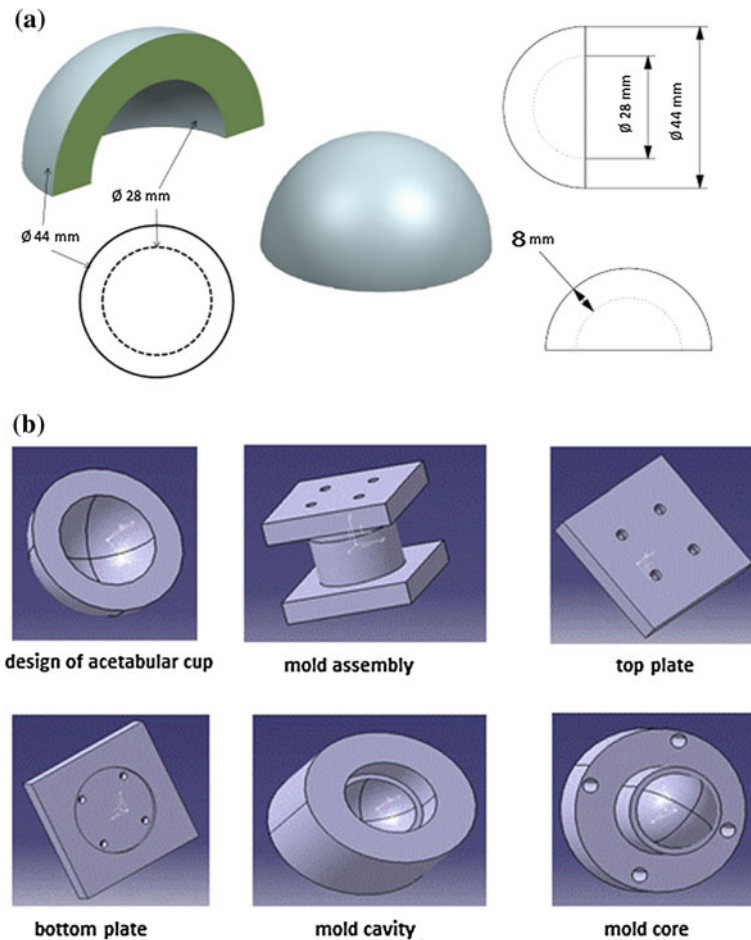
The engineering drawing and 3D sketch of the acetabular cup (a) and CAD model of the product as well as different components of compression mold assembly are shown (b) [45]
